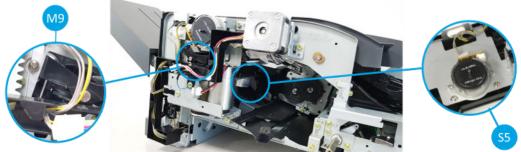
Inner finisher system - tamper unit detail view (front) (3/3)
